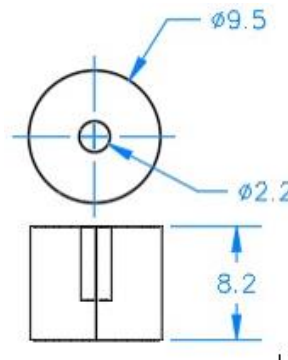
Design For 3D Printed Thermoplastic Mounting Studs, NTS
